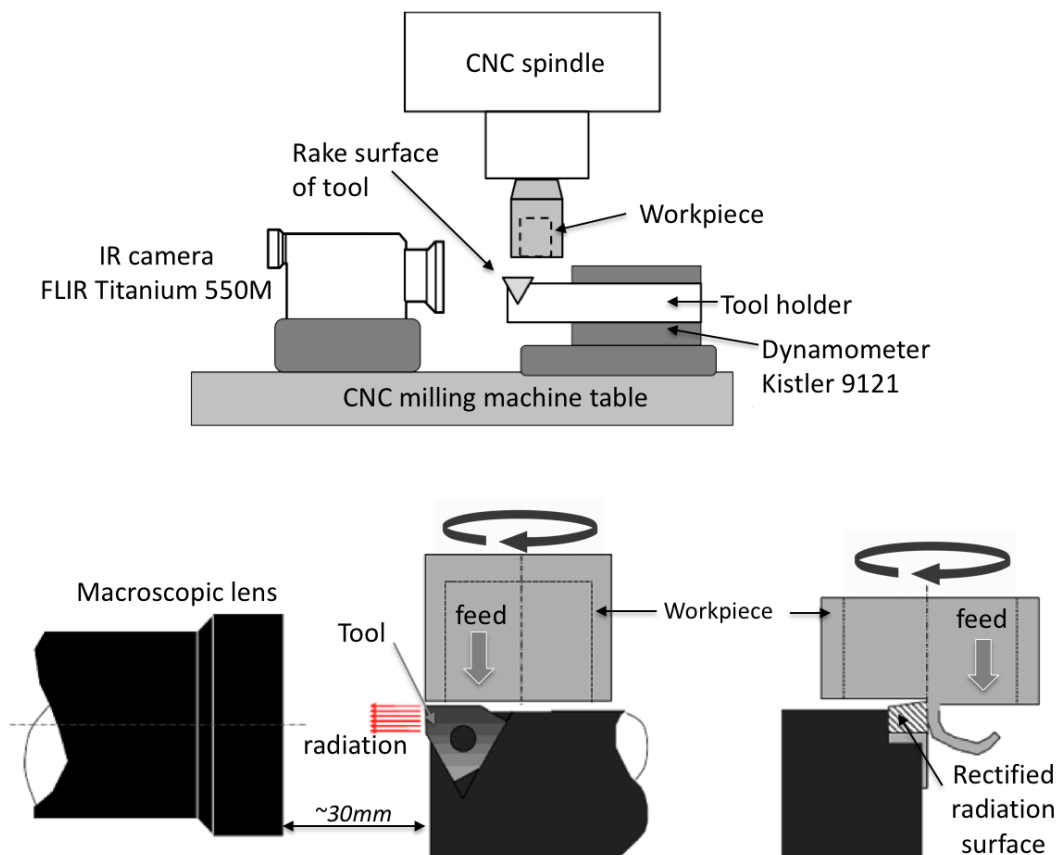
Experimental set-up for orthogonal cutting tests. The set-up is composed of tool and tool holder mounted on a dynamometer, a workpiece mounted in the splinter, and the infrared camera (upper sketch). While tool remains fixed, workpiece turns to generate the chip perpendicularly to the camera (bottom sketch).
